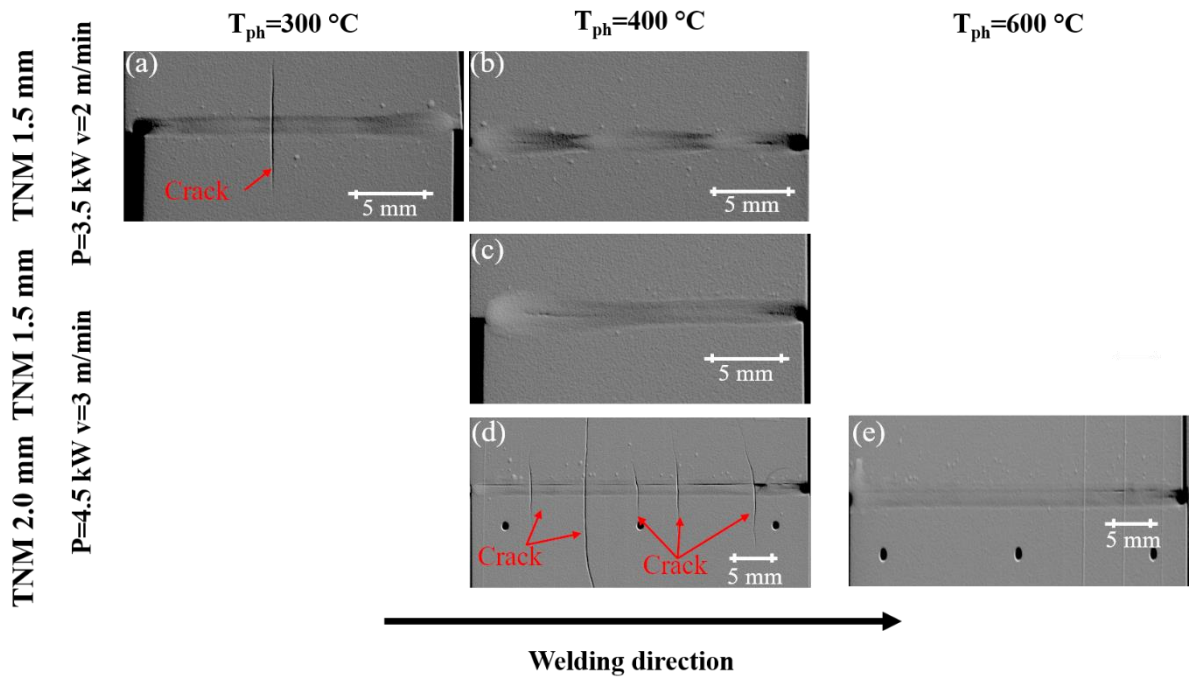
Radiography images of similar TNM joints welded with different sheet thicknesses, welding parameters and preheating temperatures.
